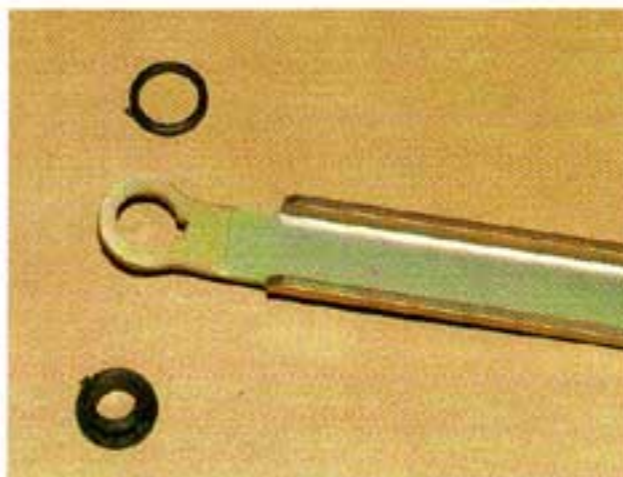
There is a hole in each end of the new transmission linkage. A two piece bushing is installed here.
